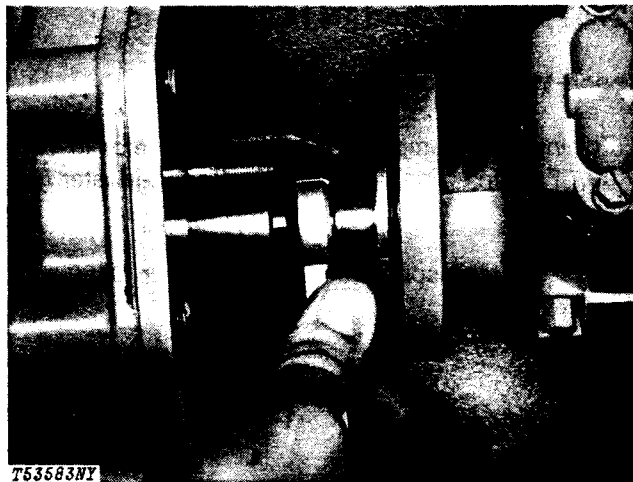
JD-256 (13371) Drive Shaft Seal Compressing Tool
